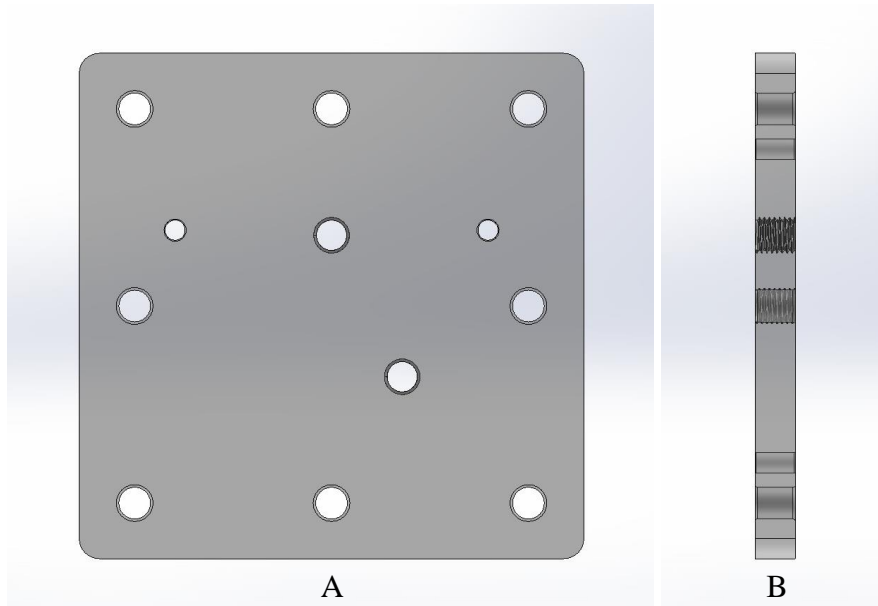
4: Front Elevation (A), End Elevation of the Side Plate
